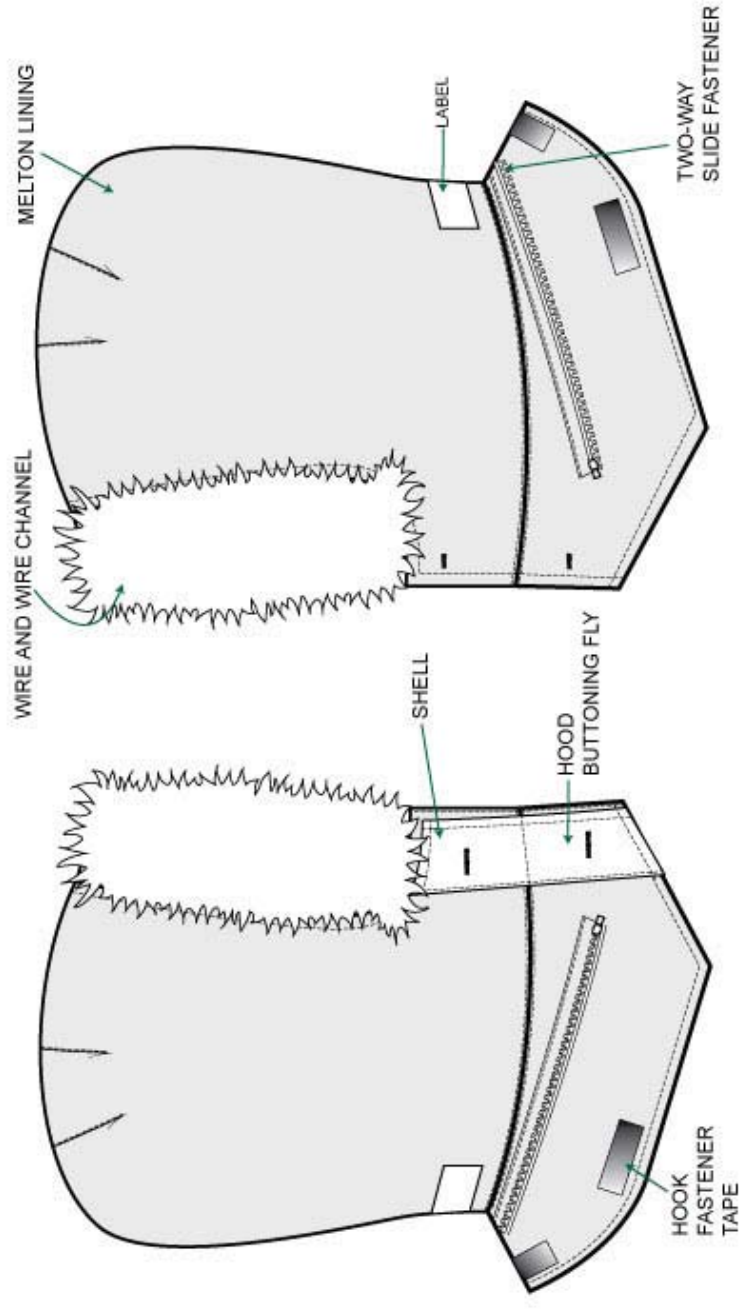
HOOD TYPE ii - FUR TRIMMED - OUTSIDE VIEW
